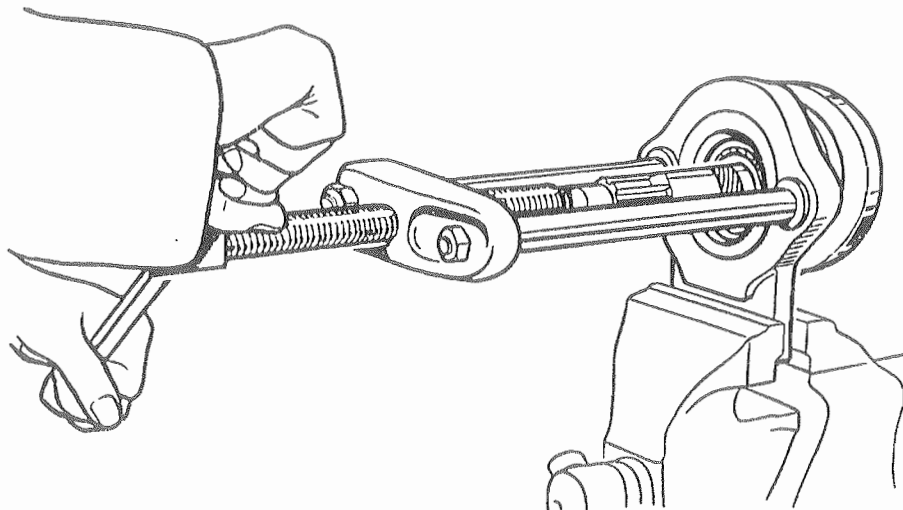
REMOVING FRONT BEARING FROM ANNULUS
